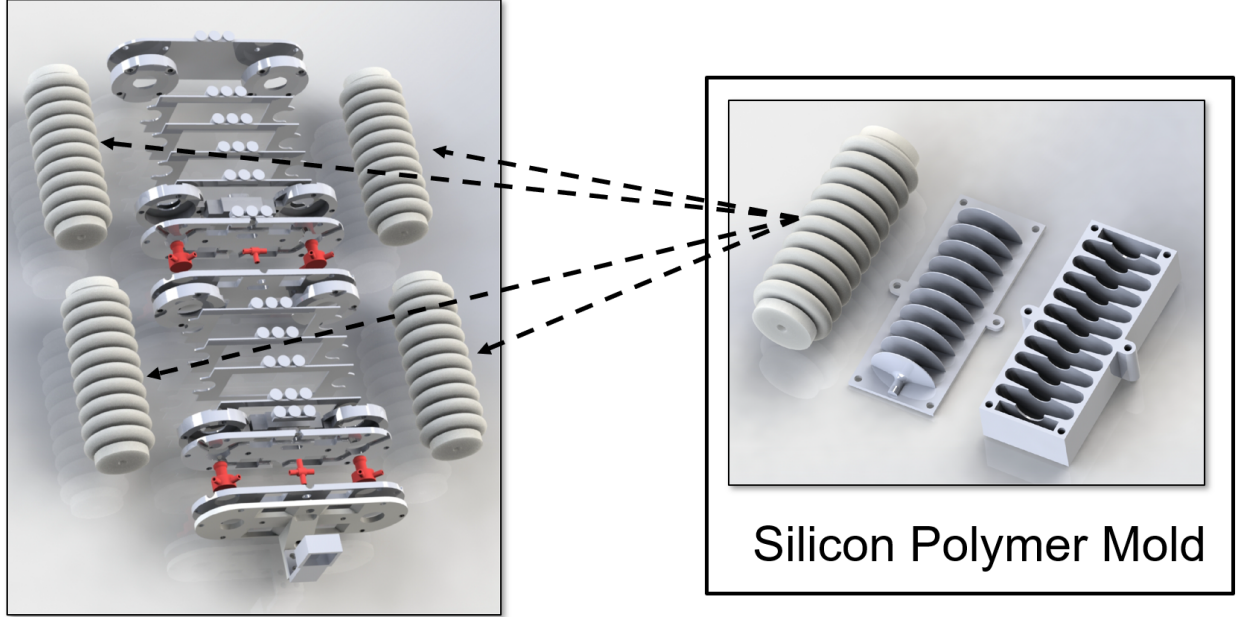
Exploded view of the soft robotic system and render of actuator and 3D printed mold used for fabrication.
